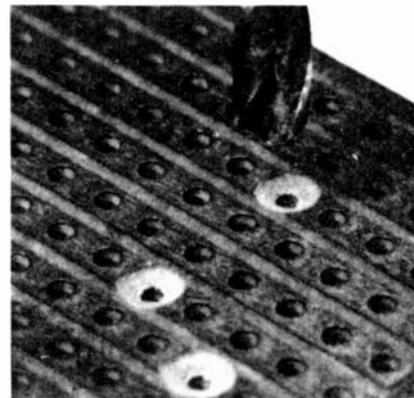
Method of identifying and using stripboard. (a) copper strip, (b) hole, break in copper, (c) solder joint. The matrix of holes and strips are given letters (strips) and numbers (holes) for easy cross-reference.
